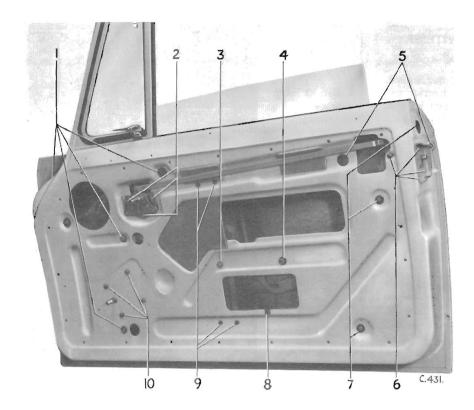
Location of door component fixings (Herald 1200, 12/50 and Vitesse)
